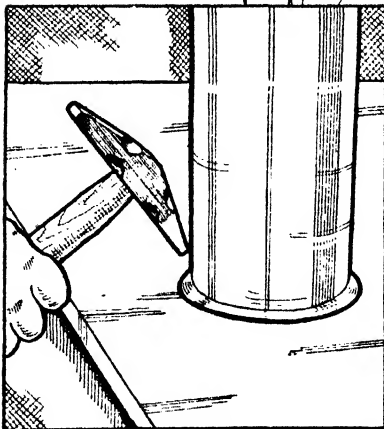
(right).—*FORMING FLANGE—SECOND OPERATION
